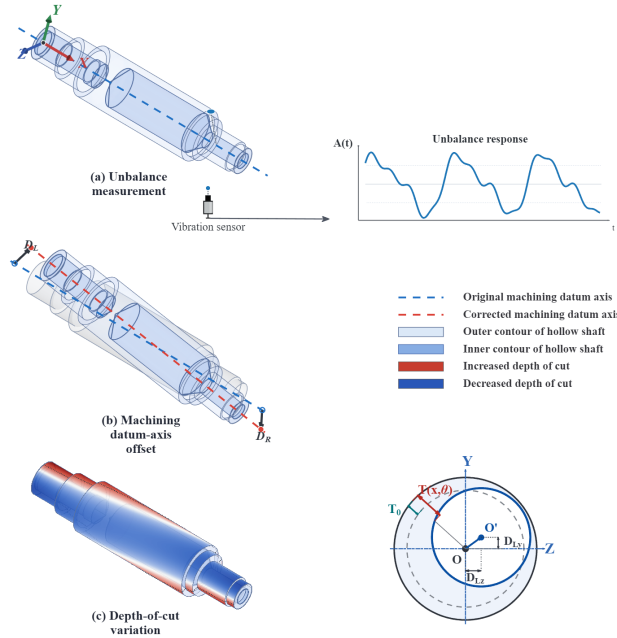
Dynamic balancing principle of a hollow shaft based on machining datum-axis correction
